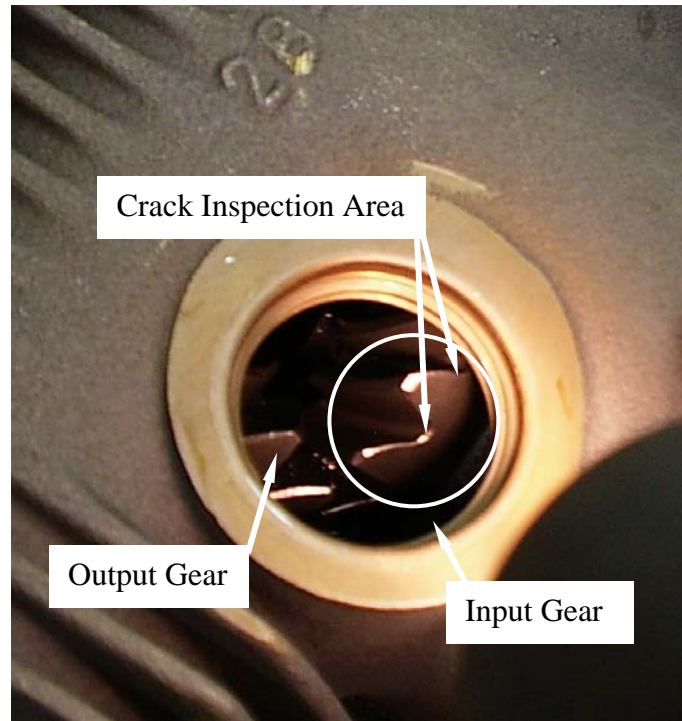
Gear Teeth Inspection – Input Gear Illuminated
